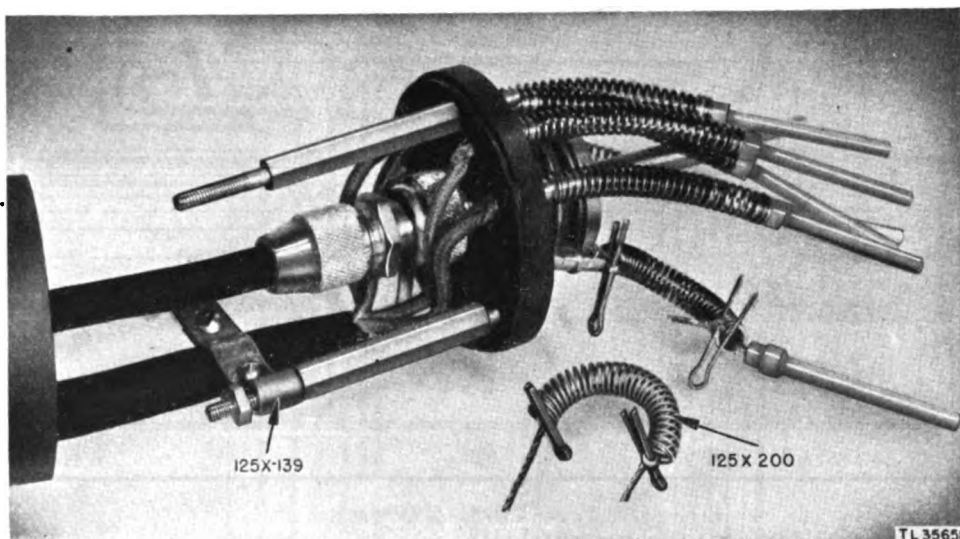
Tower TR-24-A, terminal plug, showing method of compressing springs.
